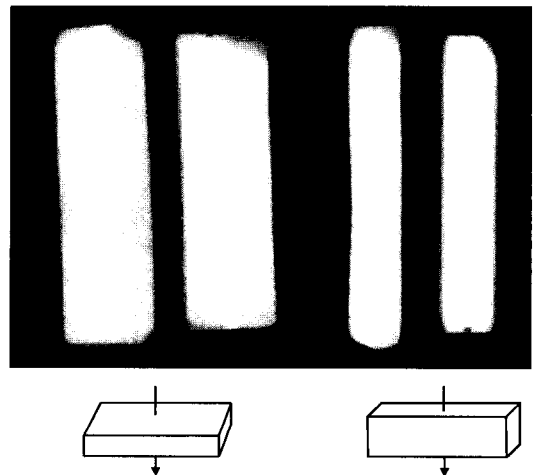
X-ray shows Ø 0.025 mm single platinum wire after pressing. (staining technique)
